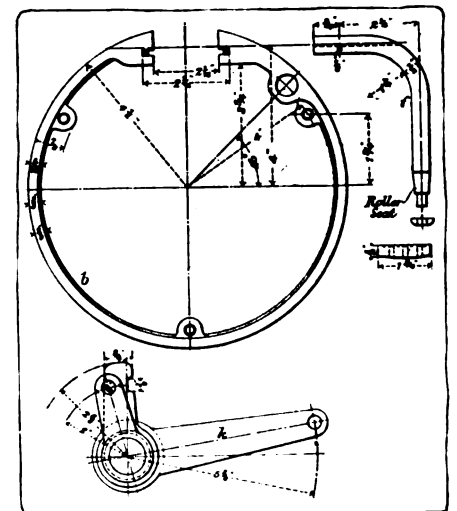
Expansile clutch ring, with one member of clutch lever. Fig. 7—Bell lever k
